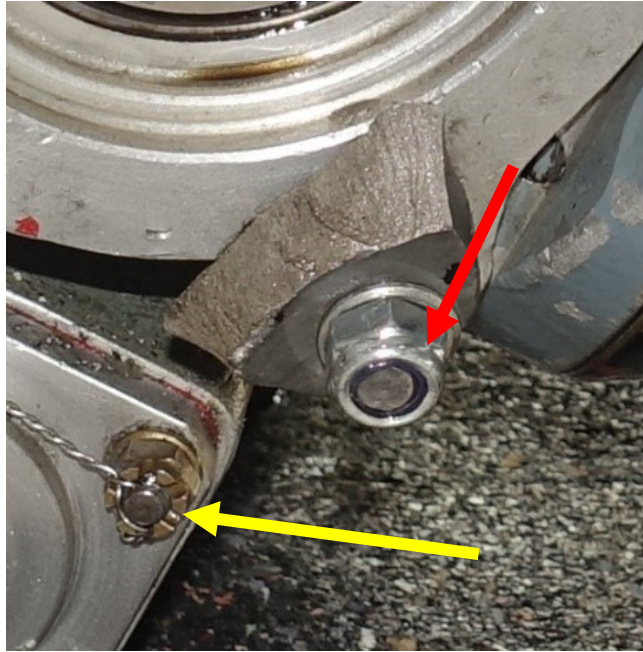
Engine housing – a nylon locknut (red arrow) on a bolt with a thread that is too short, and a castellated nut secured by wire (yellow arrow).
